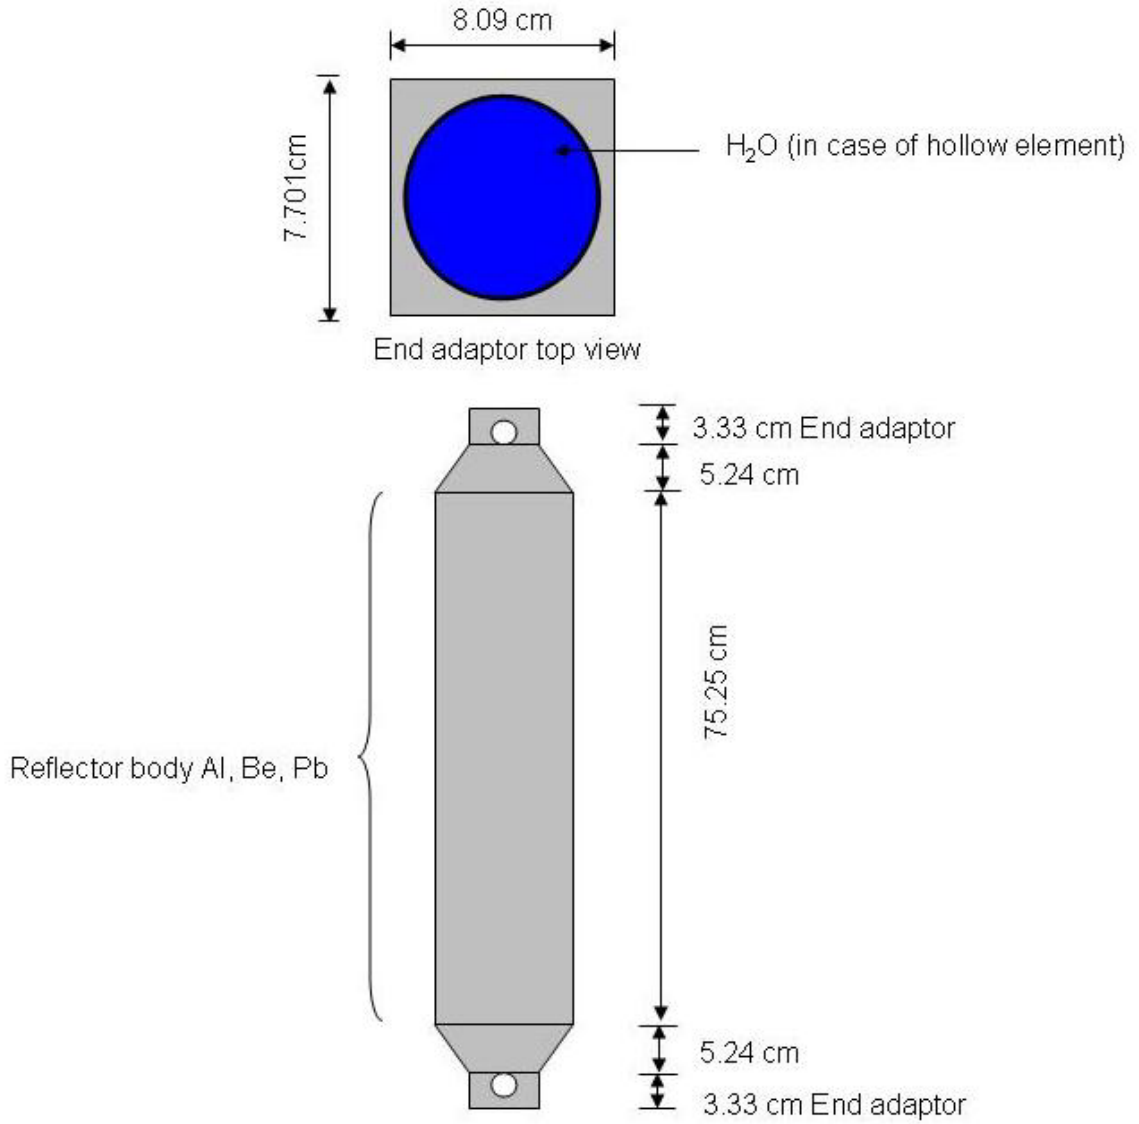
Radial (above) and Axial (below) View of the Reflector Assembly Casing. [1]
